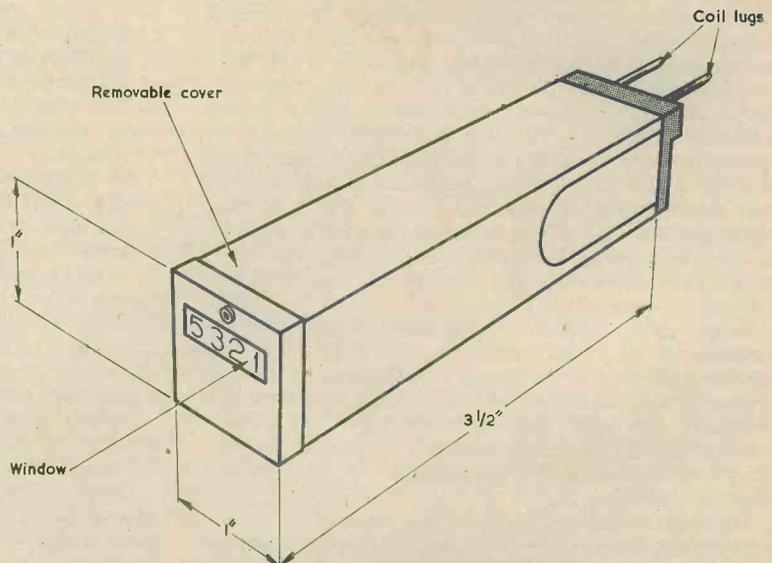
The electromagnetic counter has the external appearance and dimensions shown here
